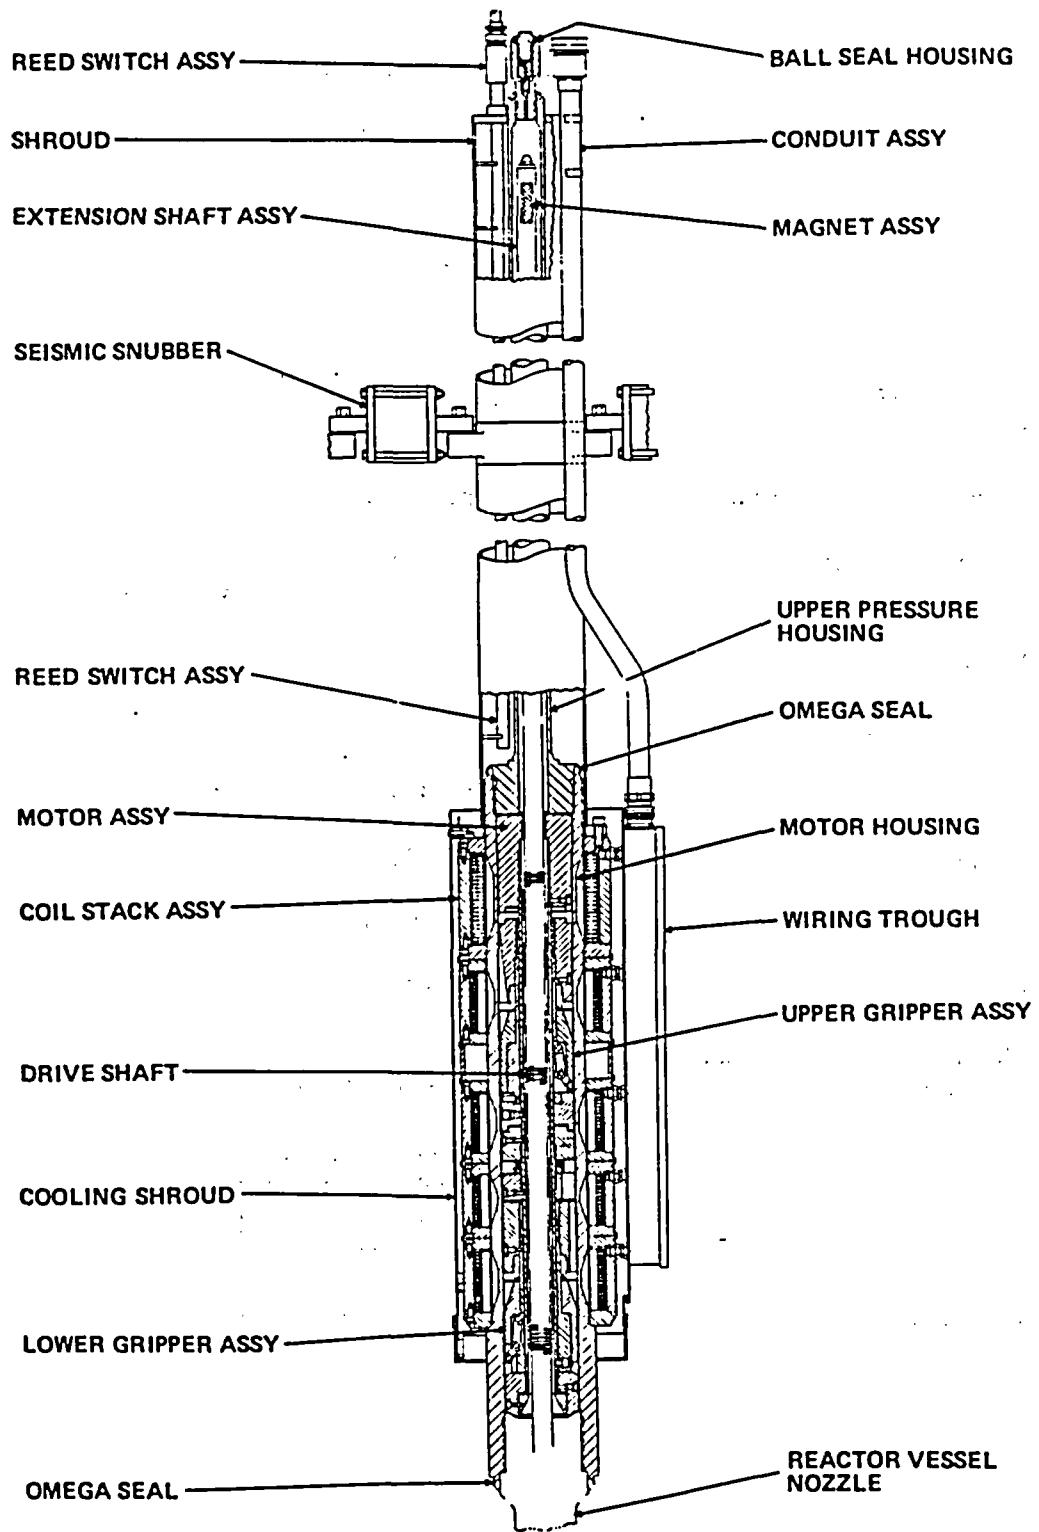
Combustion Engineering magnetic jack control element drive mechanism.
